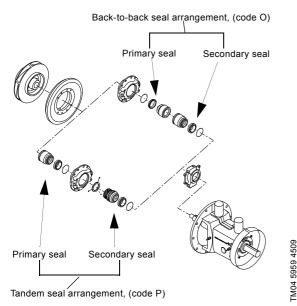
NKG pump with double-seal arrangements for a standard mechanical seals arranged in back-to-back or tandem.
